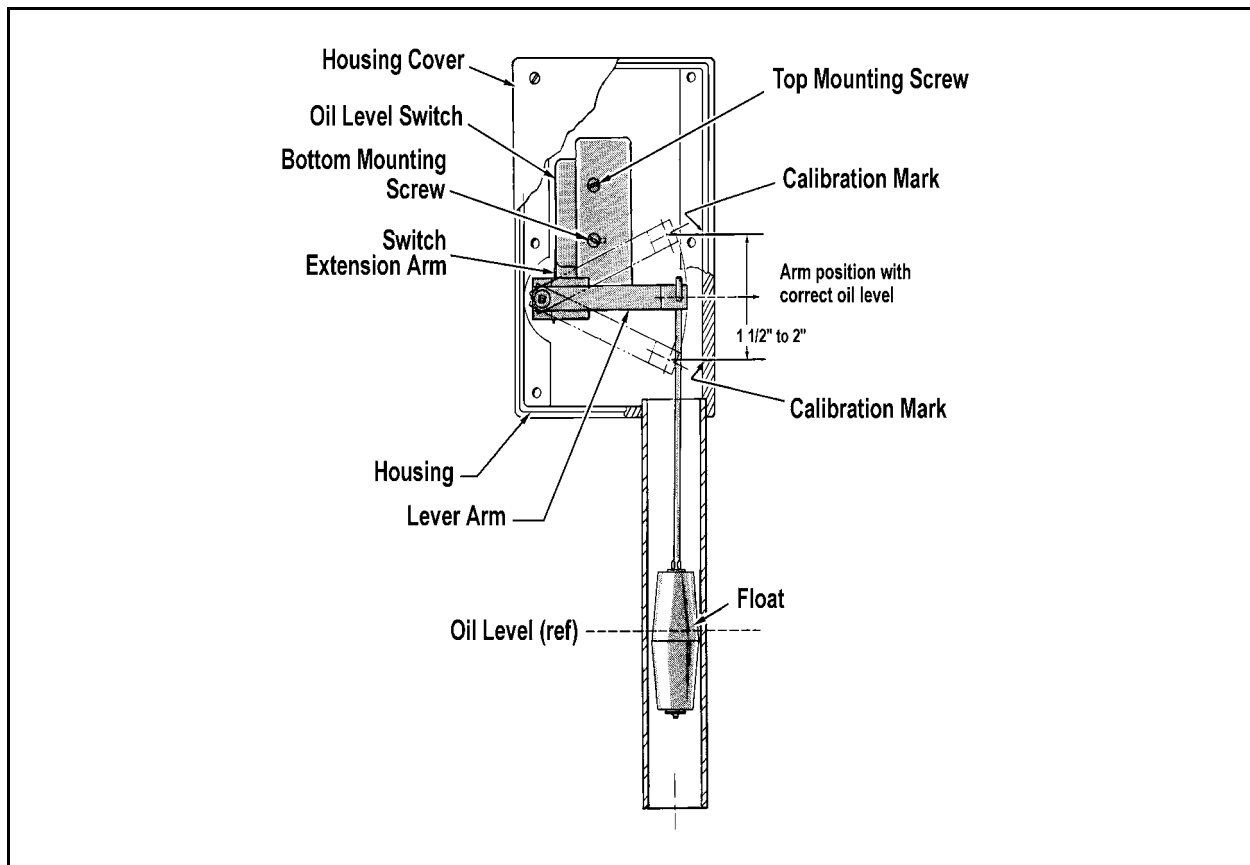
Water Pump Oil Level Float Switch (optional equipment)
